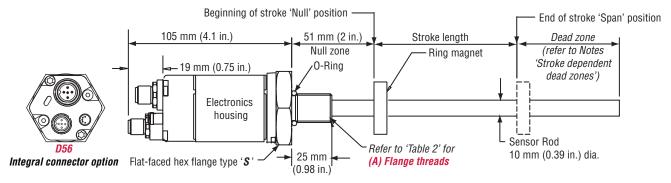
Model RH Rod-style sensor dimension reference (shown with D56 integral connector options)
